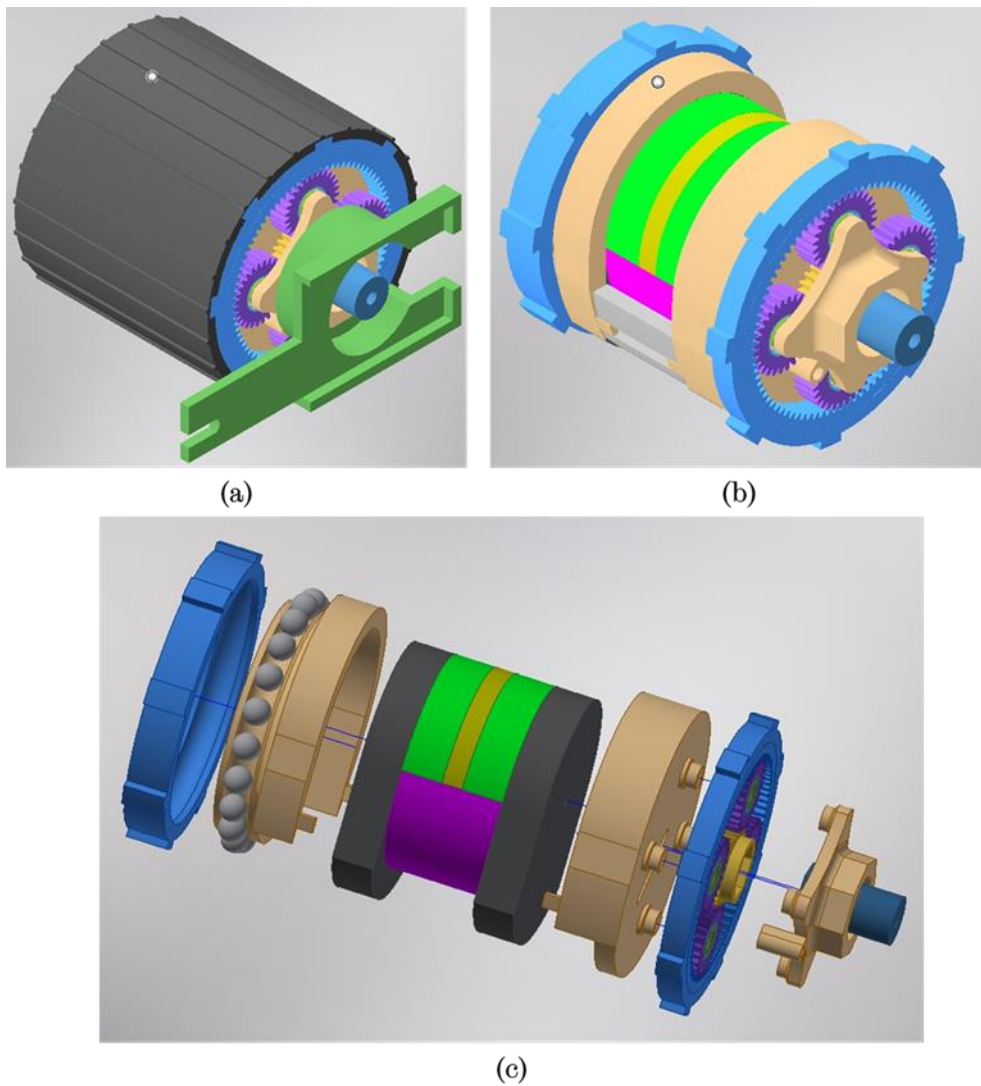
Final wheel design to be implemented in a of-the-shelf MR. (a) Isometric view of the full wheel. (b) Isometric view of the internal components of the wheel. (c) Exploded view of all the internal components of the wheel.
